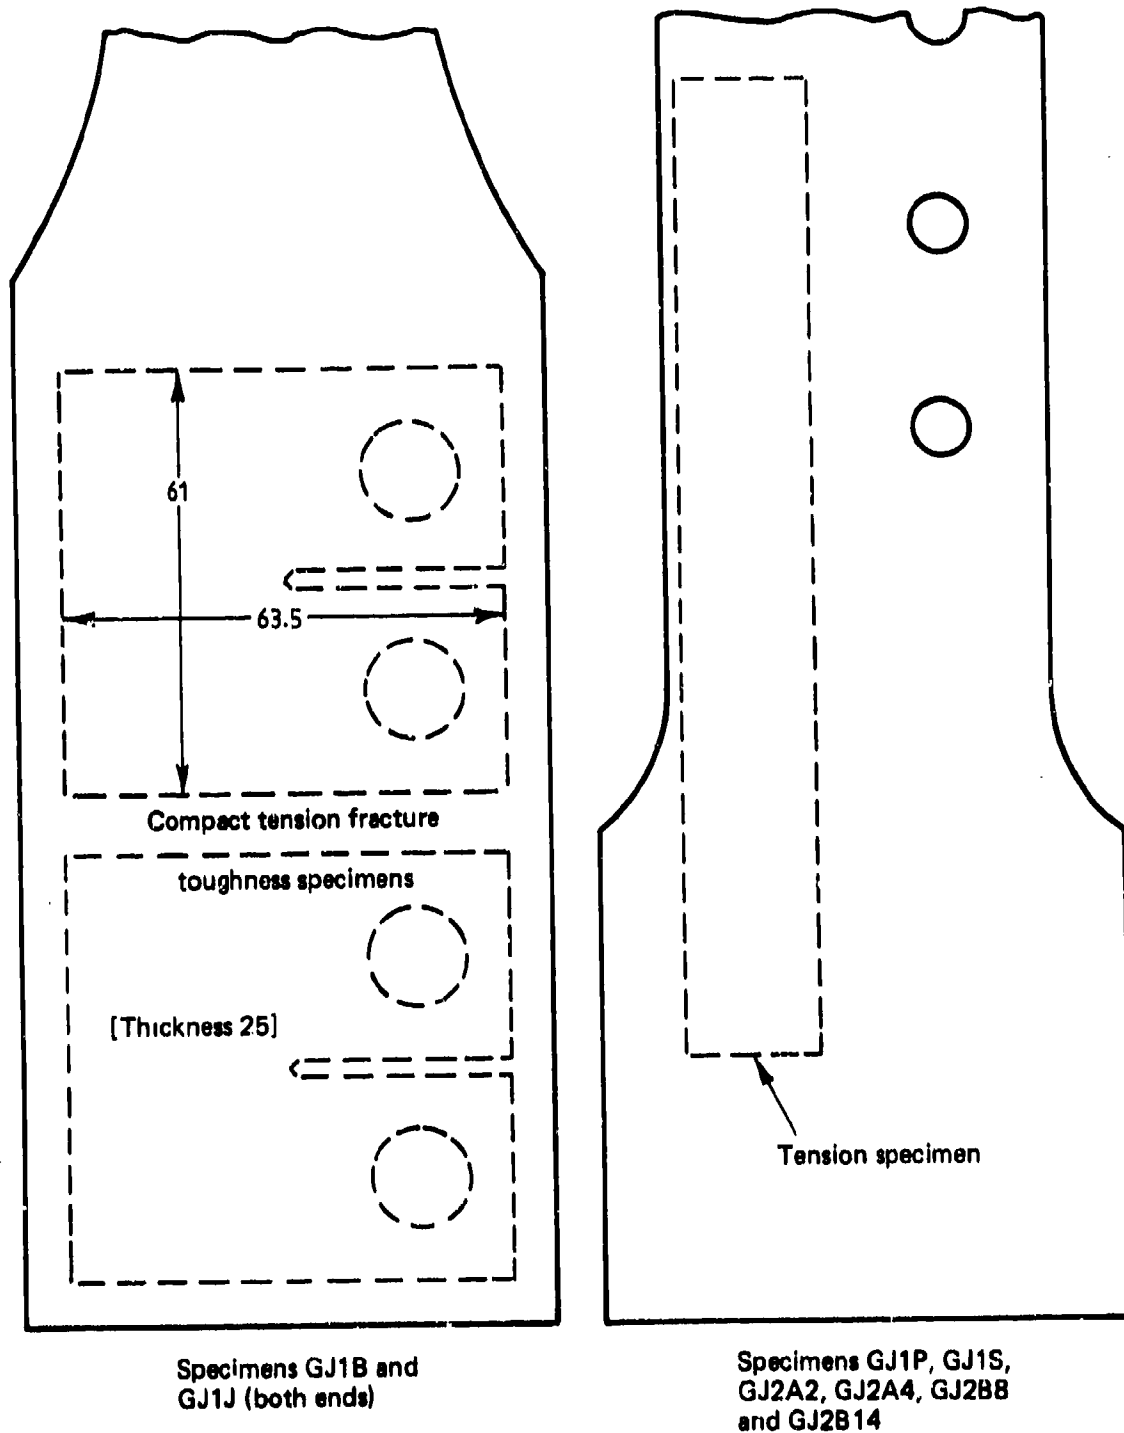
LOCATIONS OF FRACTURE TOUGHNESS AND TENSION SPECIMENS
